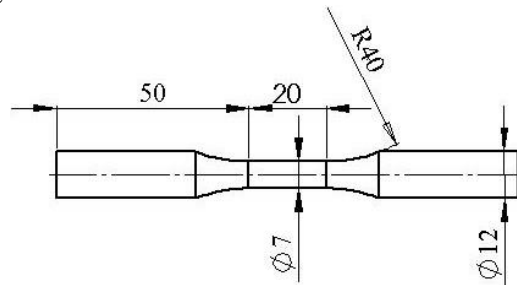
The tensile specimen geometry and its dimensions(in mm)
